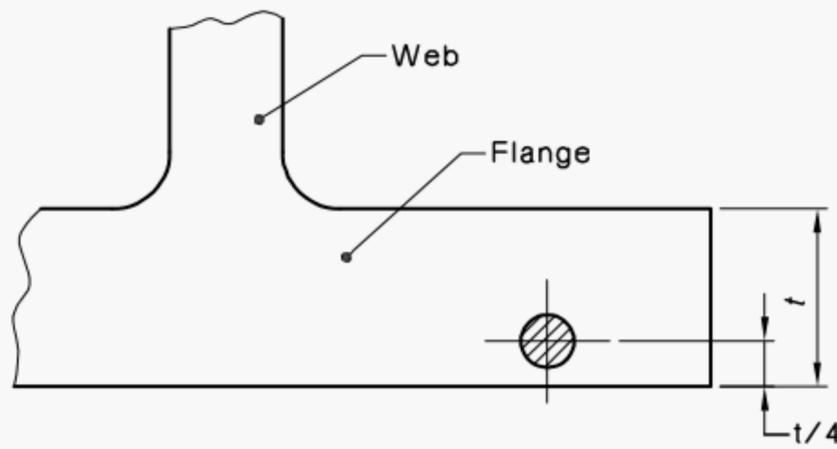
SECTIONS—LOCATION OF TEST PIECES FOR TENSILE TESTING IN A FLANGE OR WEB
